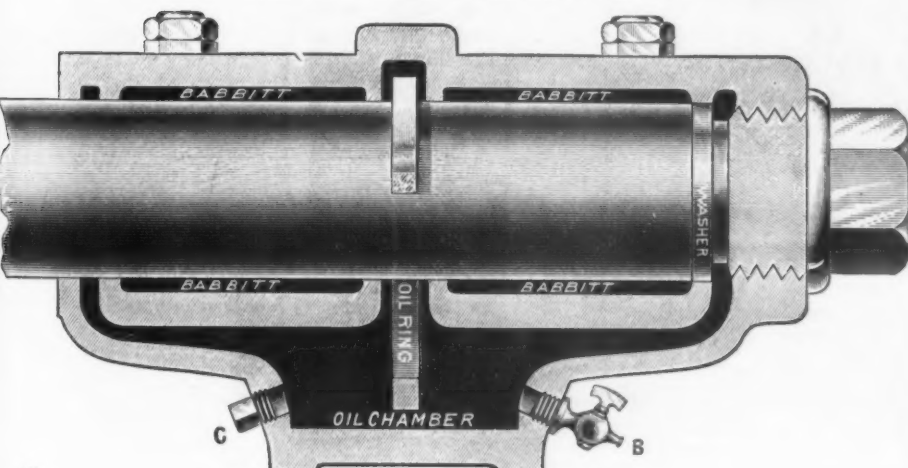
Journal Bearing Used on Buffalo Blower.
